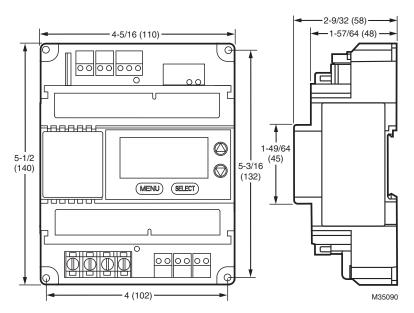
Wall Mount and Meter Dimensions (front and side view).
